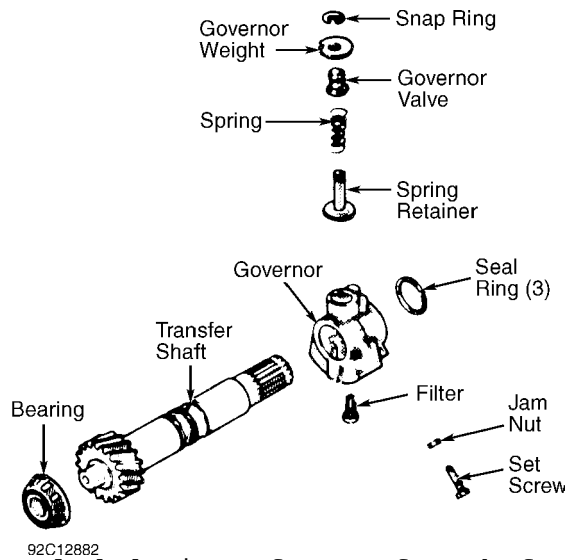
Exploded View of Transfer Shaft & Governor (F3A20 Series)
